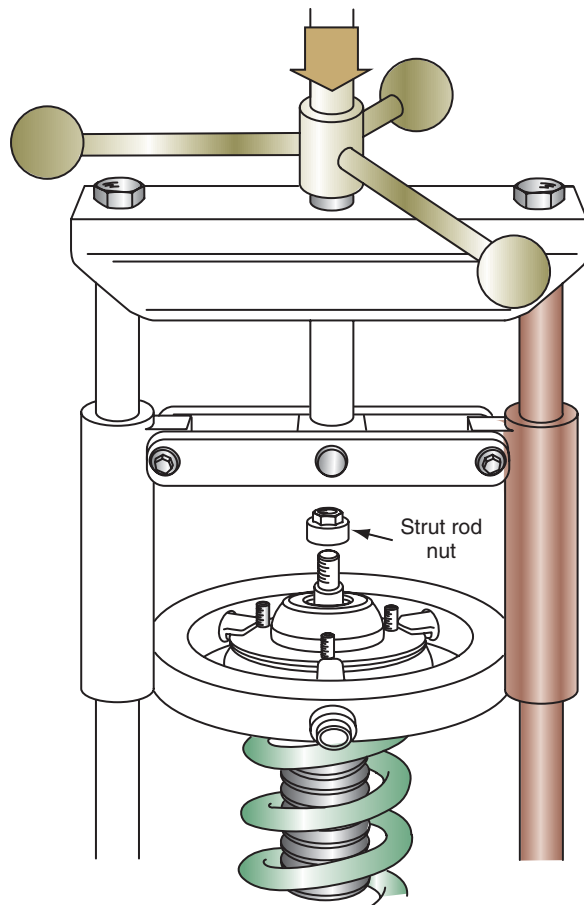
Coil spring and strut assembly mounted in a spring compressing tool.
